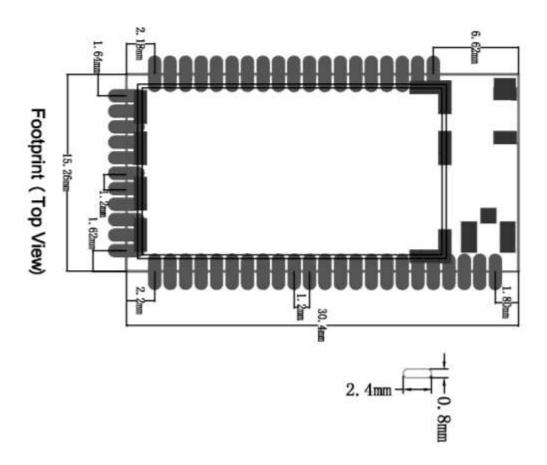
Recommended PCB Mounting Pattern (Unit: mm, Deviation:0.02mm)TOP View
